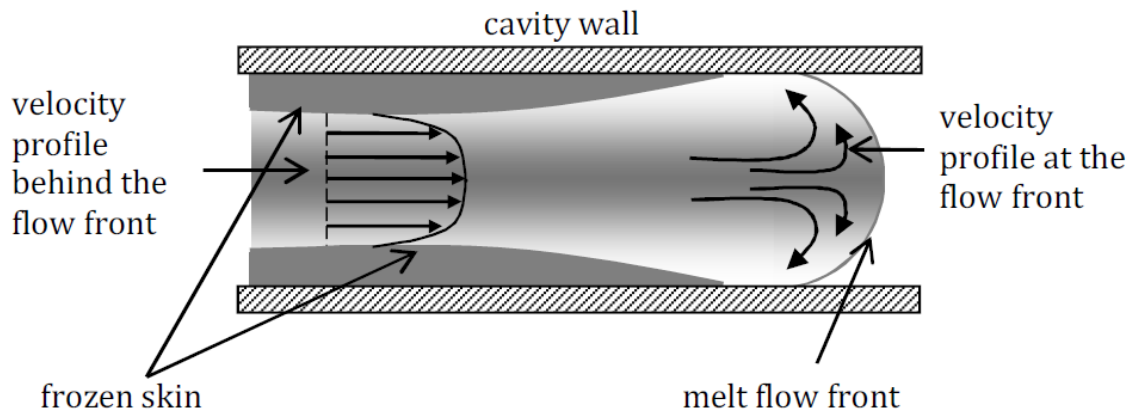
Fountain-flow and solidification mechanisms through the part thickness during injection moulding [35].
